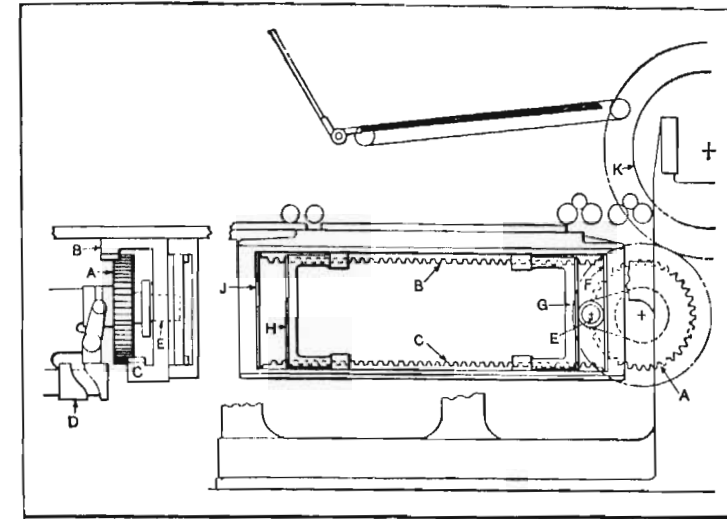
Double-rack Shifting-gear and Crank Combination for Traversing Bed of a Printing Press
